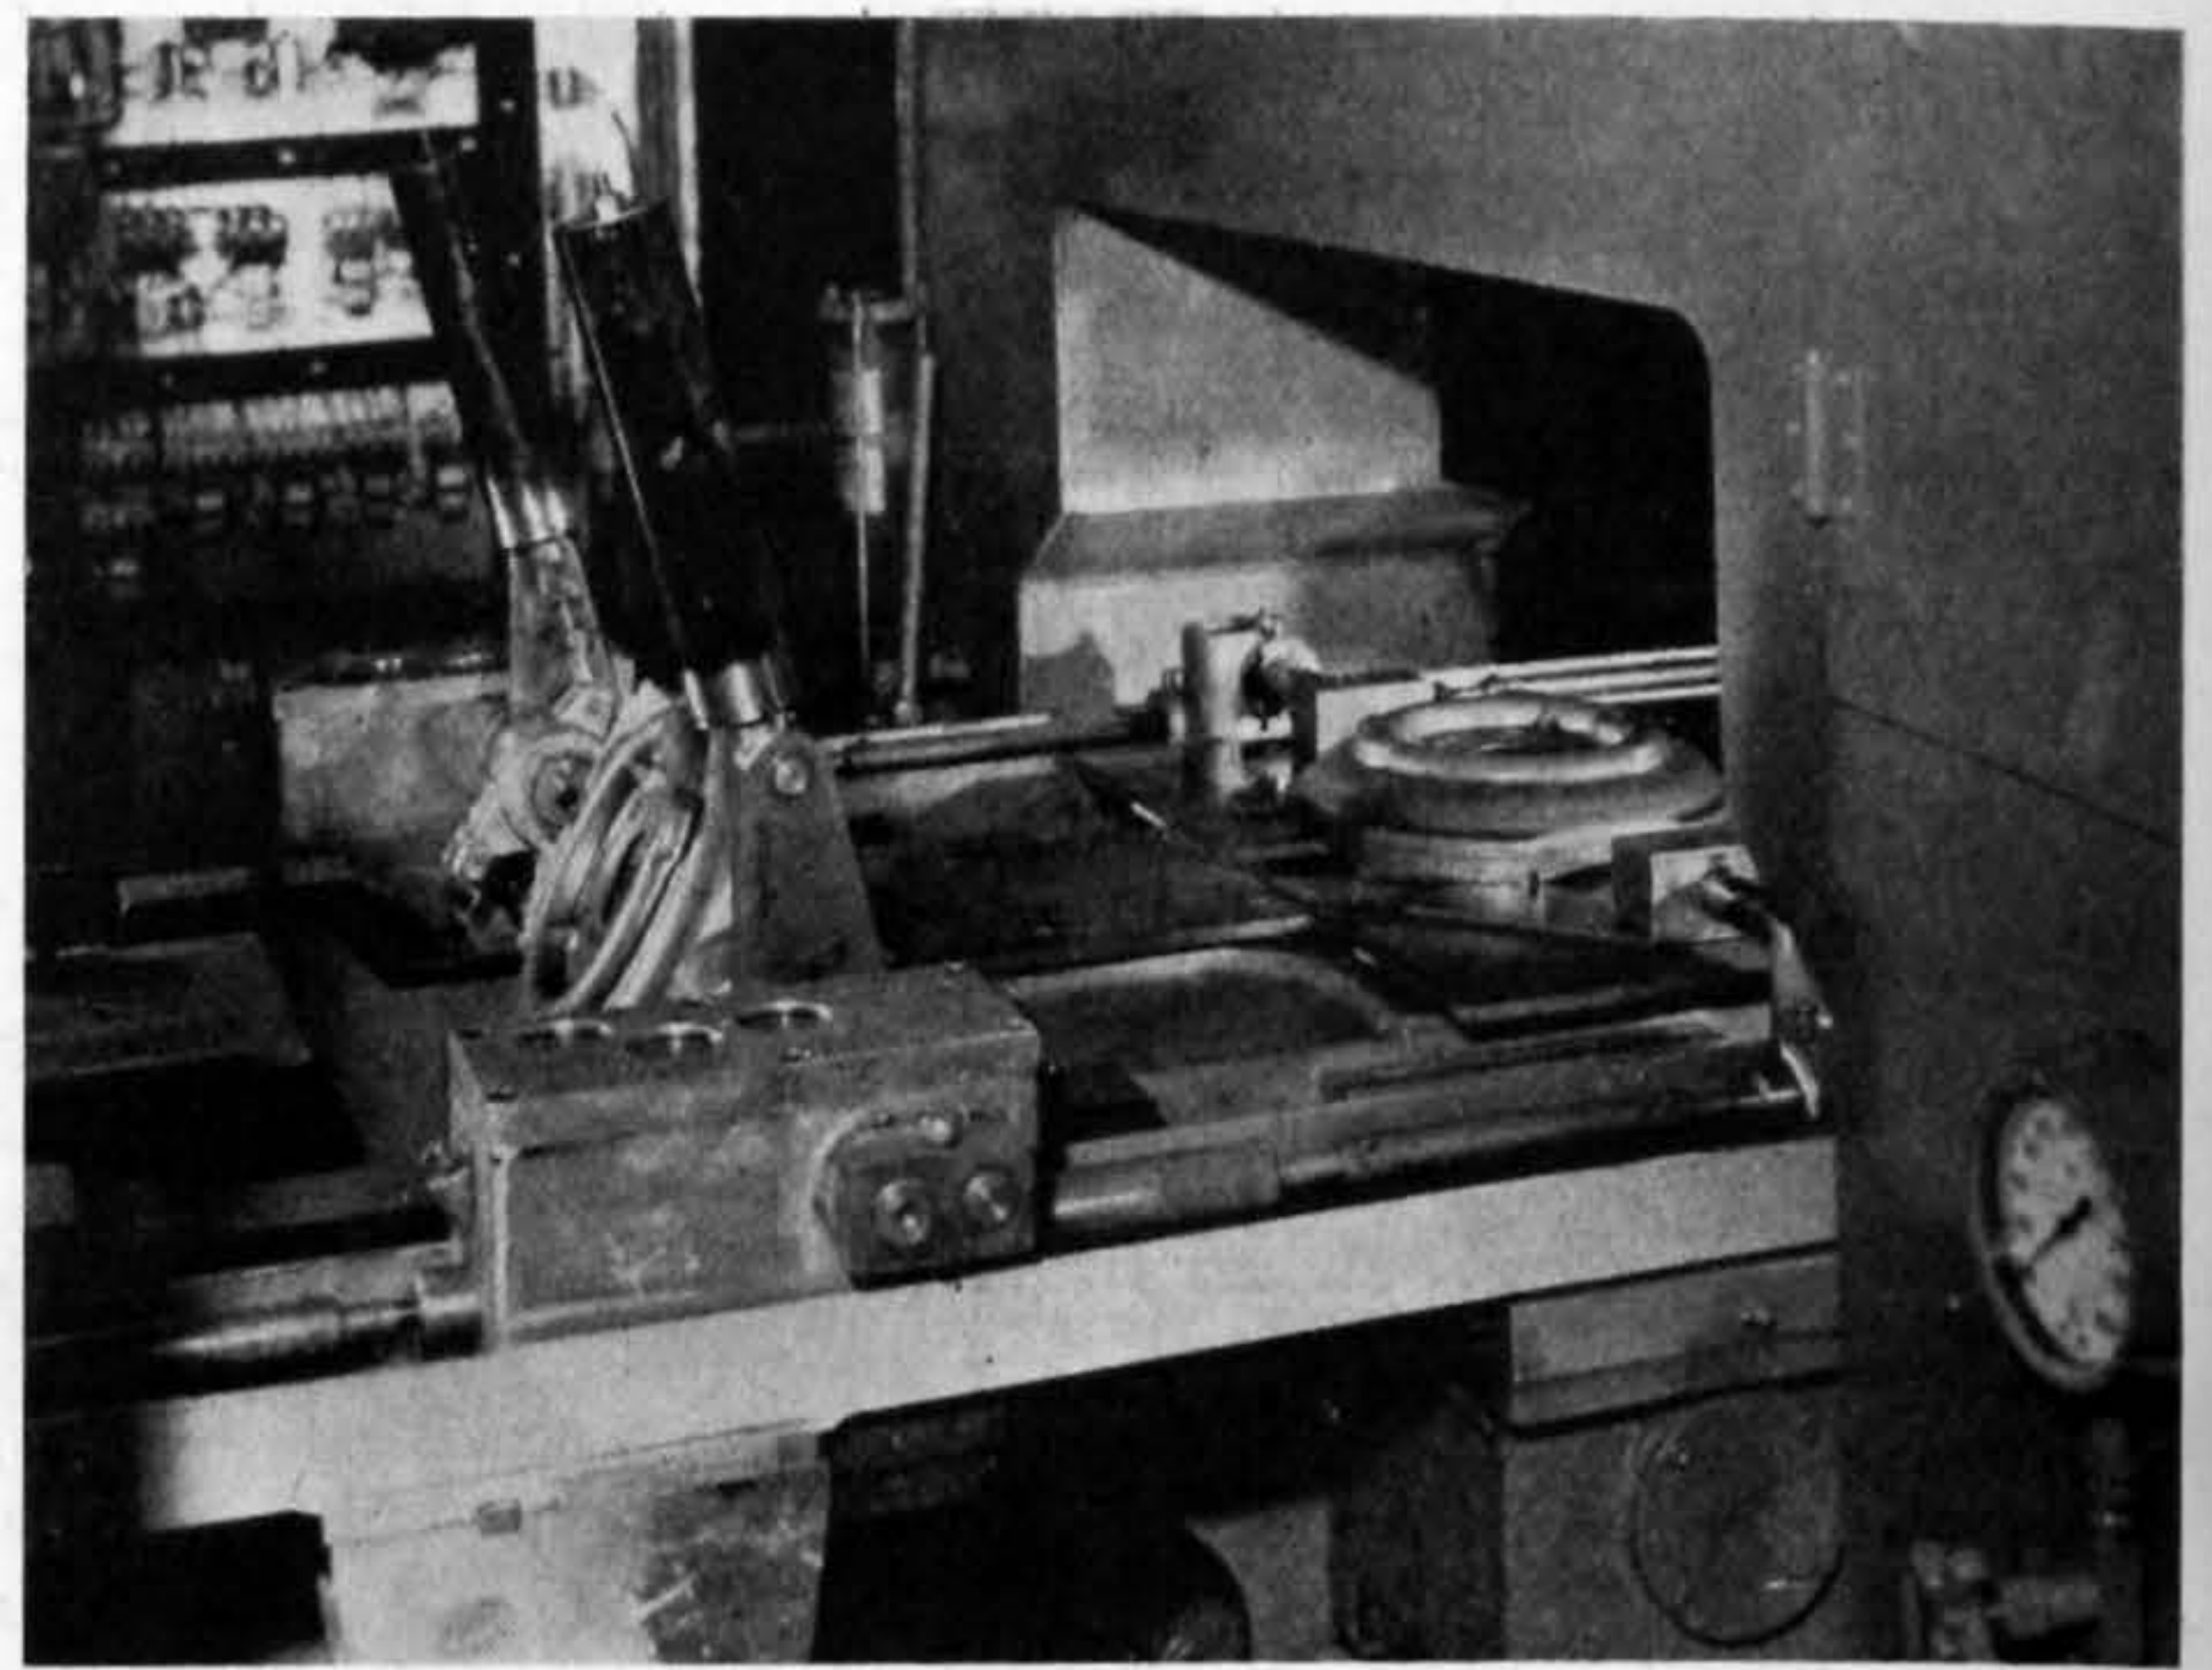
Flip-over mechanism between third and fourth press shown turning over a wheel
